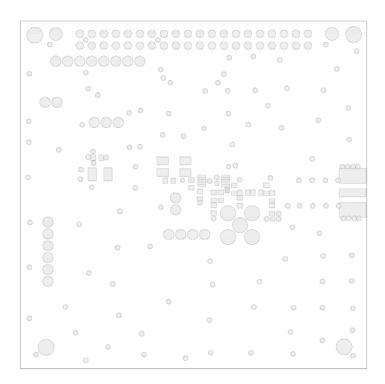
Infineon Evaluation Board V1.1, top side solder mask
